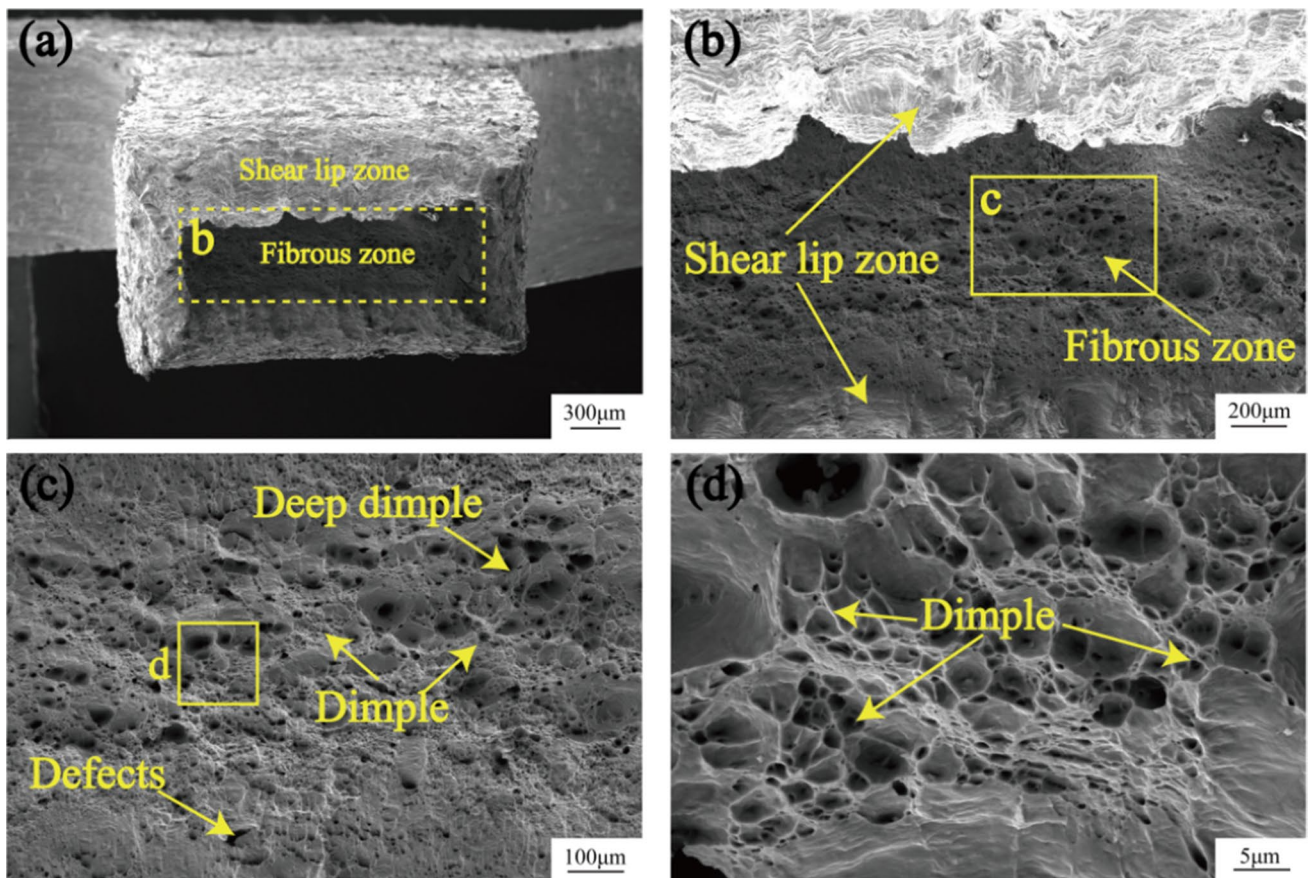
Tensile fracture morphology of BM. a Macroscopic fracture morphology of BM; b shear lip region and fiber region of BM fracture; c partial enlarged view of b; d partial enlarged view of c
